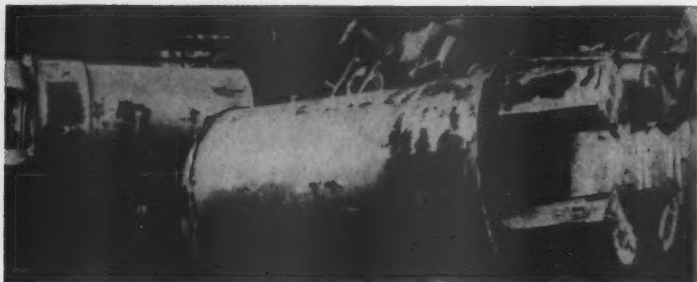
MONEL BUSHINGS, WEIGHING 700 LB. EACH, SHOWING ADDITIONAL EXTENSION OF SLIGHTLY LARGER SECTION BETWEEN BUSHING PROPER AND FEEDING HEADS.
